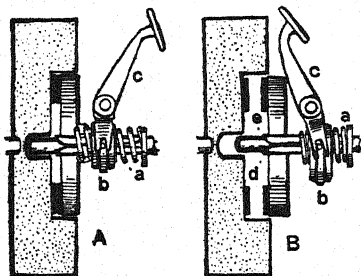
Simple type of spring-pressure clutch. a—Coil spring. b—Shifting yoke. c—Foot pedal. d and e—Friction rings.
